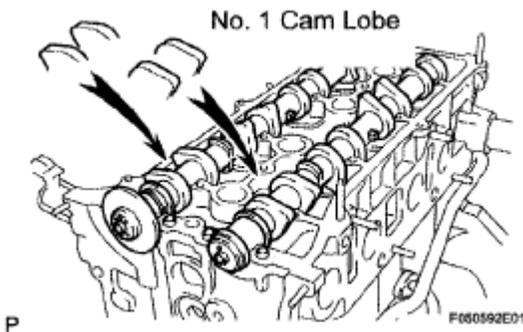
Placing Camshafts On Cylinder Head With No. 1 Cam Lobes
